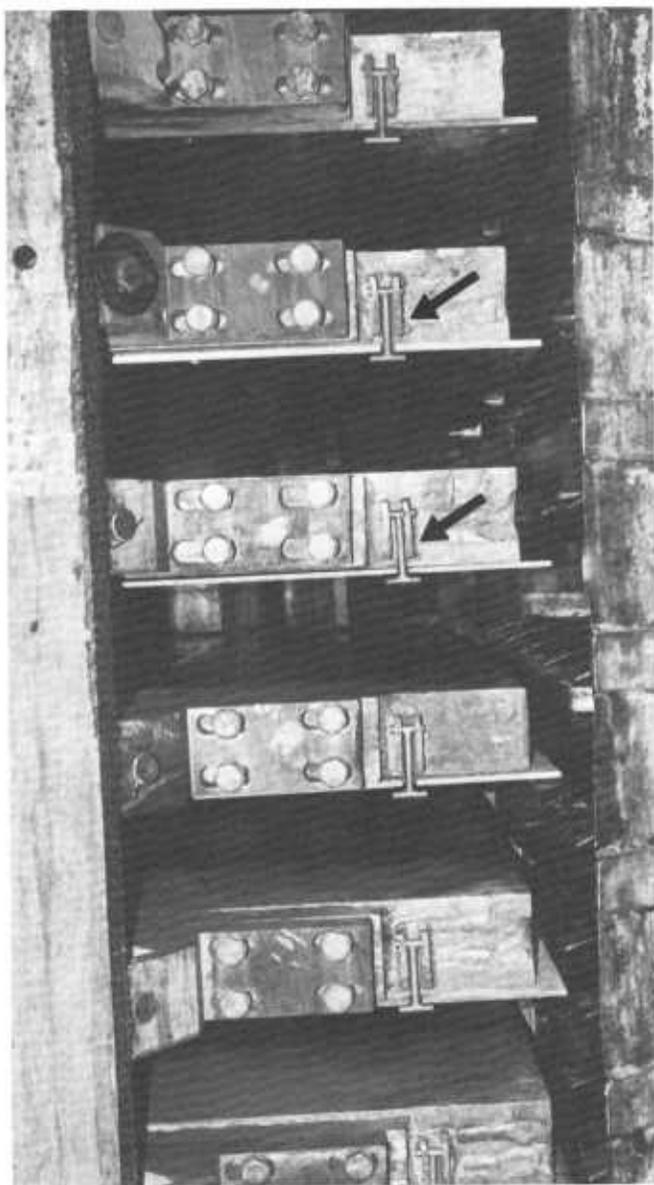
Quick release T-shaped fasteners for top caul in hotpress (S2S).
